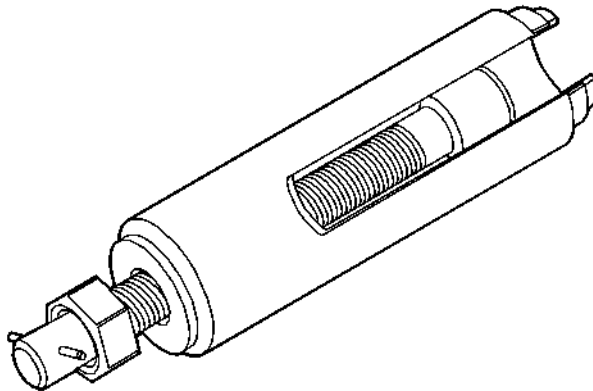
Nozzle Fixture Clamp Plate,J 39264
